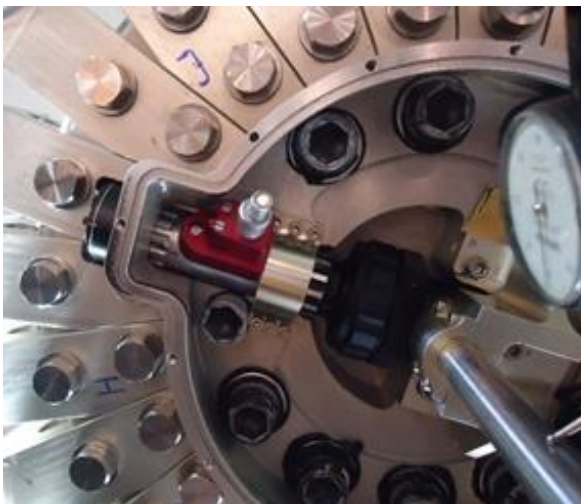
Inside the borescope casing, while balancing the shank of the 90° angular adapter
